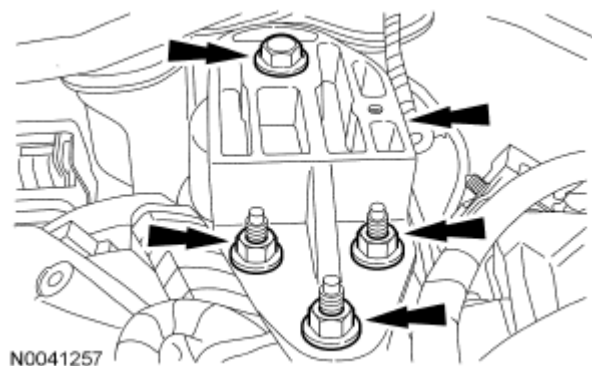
Locating Engine Mount Bracket, Bolt And Nuts
